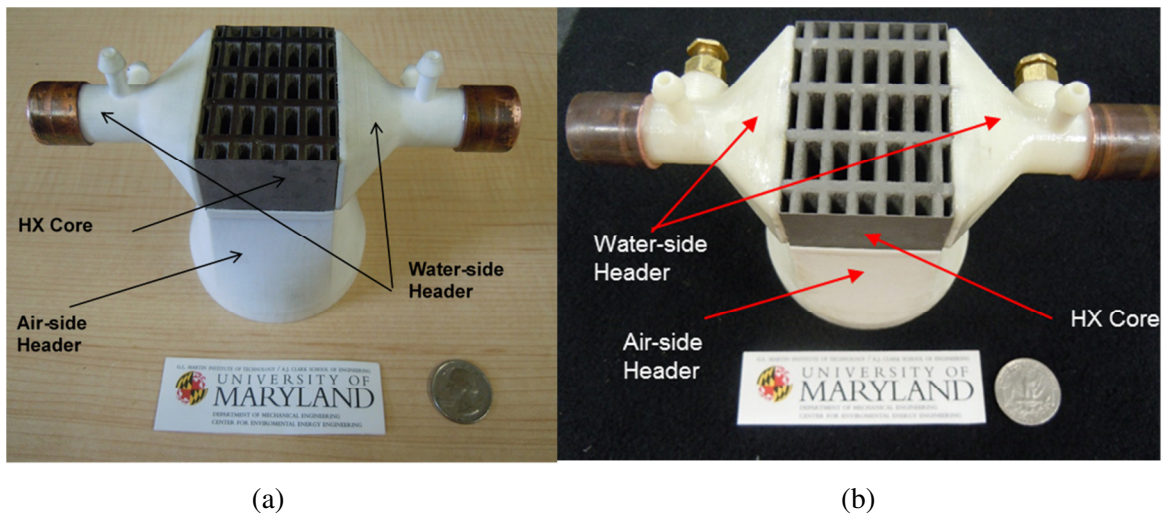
Assembly test section (a) Titanium alloy (b) Stainless steel
